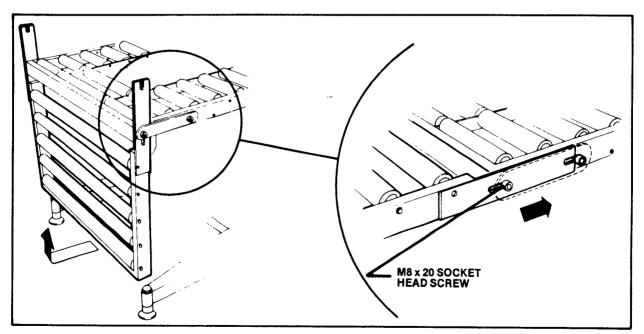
INFEED CONVEYOR ASSEMBLY
